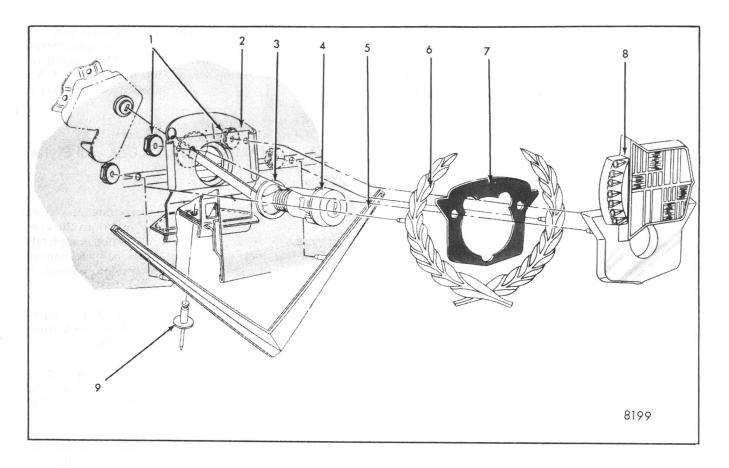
Cadillac Rear Compartment Swivel Emblem and Lock Cylinder
